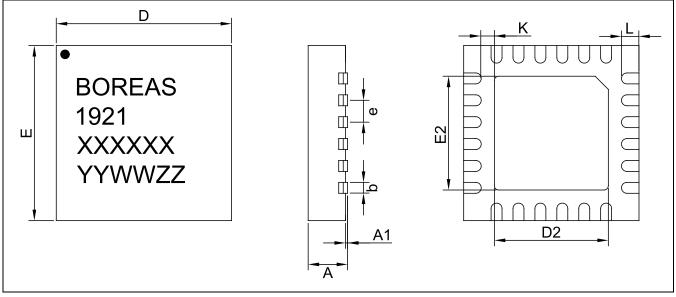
QFN 24L 4.0mm × 4.0mm package outline drawing
